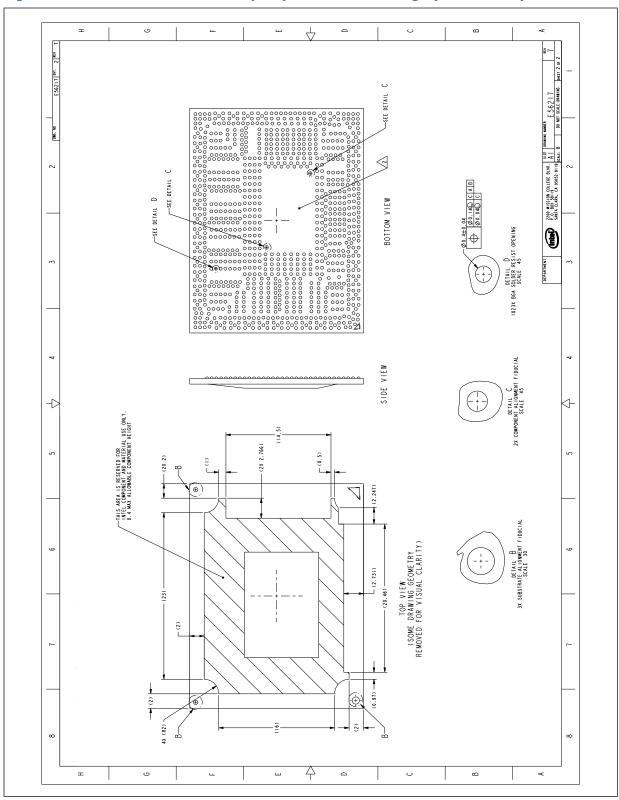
Processor BGA1224 4C (GT2) Mechanical Package (Sheet 1 of 2)
